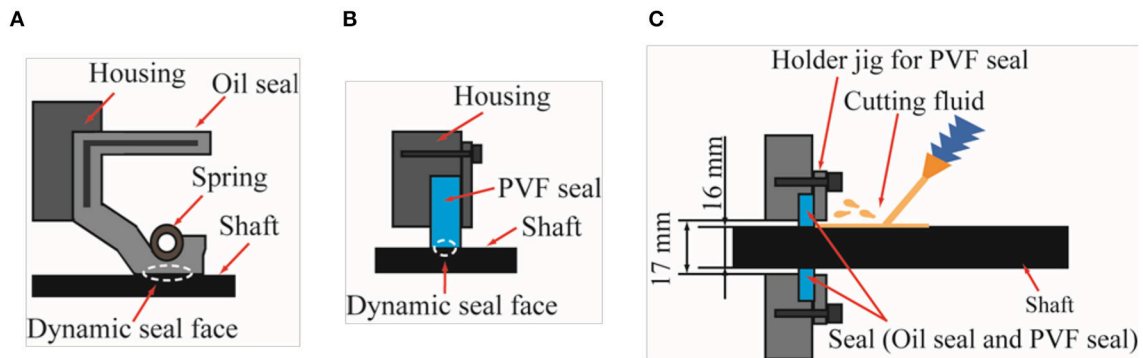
| (A) Schematic of dynamic seal face between an oil seal and the shaft. (B) Schematic of dynamic seal face between a PVF seal and the shaft. (C) Schematic of sealing system.
